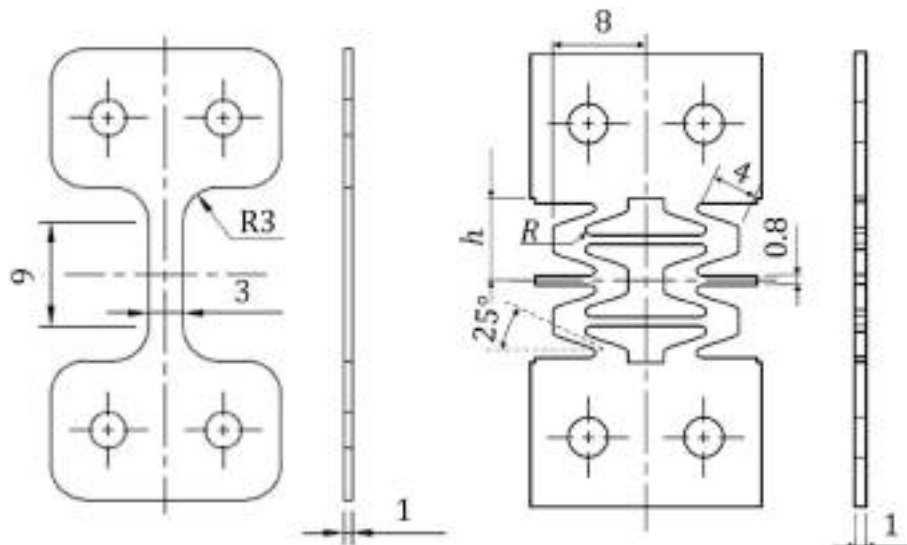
Geometry and main dimensions of the specimens used in tensile testing: (a) dog-bone-shaped and (b) auxetic. All dimensions are in millimetres.
